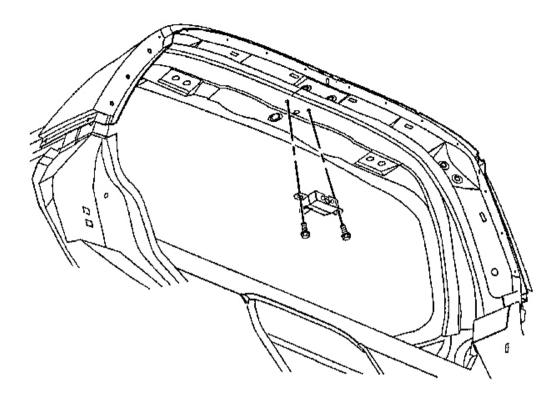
Antenna Buffer To Roof Bow Retaining Screws Courtesy of GENERAL MOTORS CORP.
